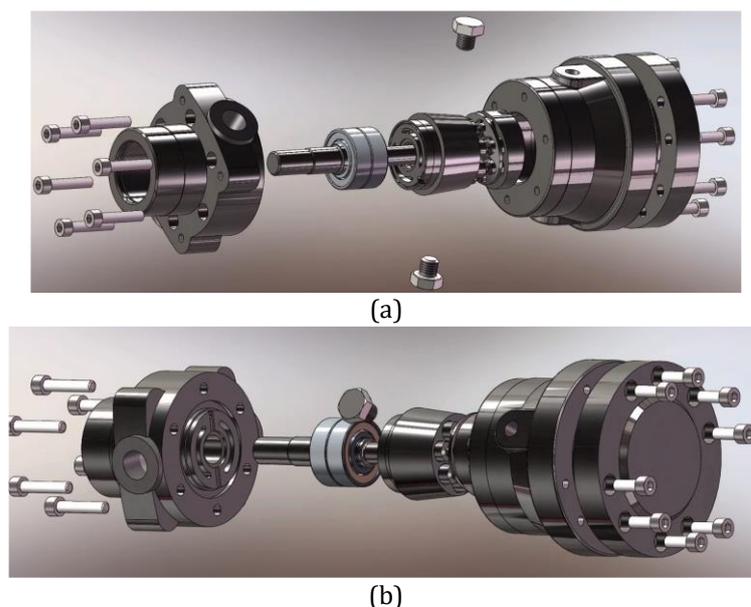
The simulation diagram of disassembly of components in the last step (a: disassemble the front and rear pump covers, front and rear wash plates; b: disassemble the front rotating shaft and bearing components)
